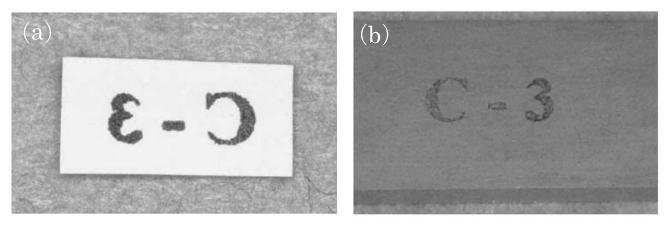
Printing the mark directly on a specimen plate: (a) Printed identification in reverse image on paper; (b) Label printed on a specimen plate.
